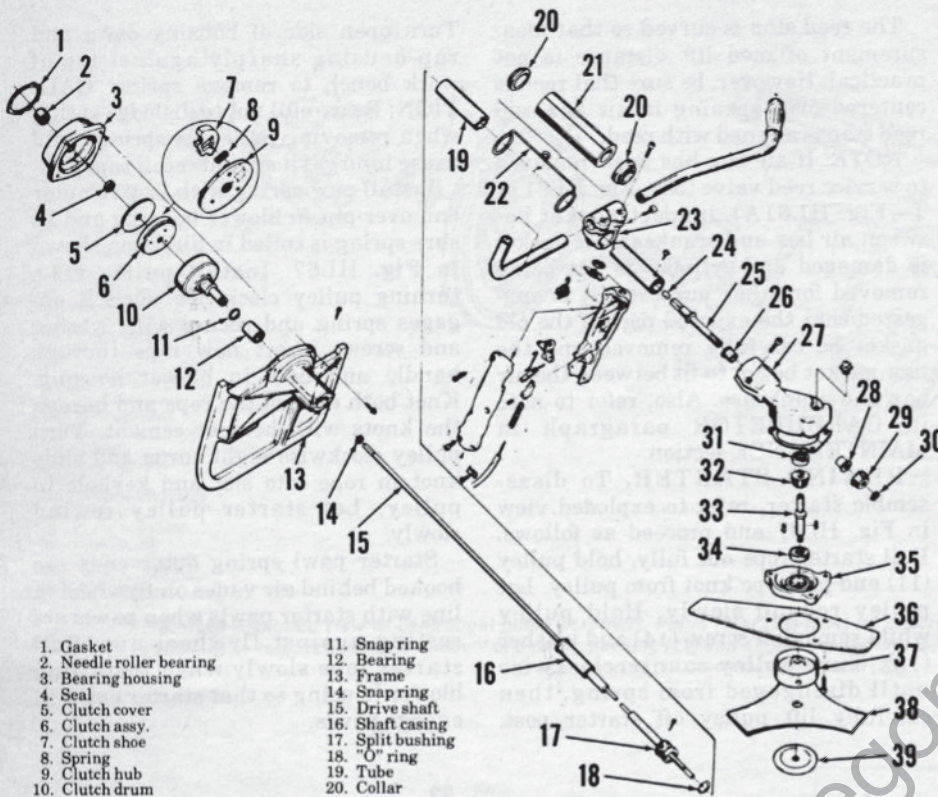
Exploded view of late model brushcutter assembly used on XL series.
